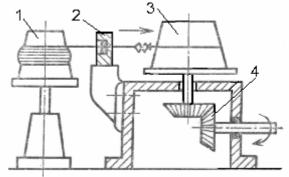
Drum-type drawing bench: 1 – whirly with a coil of wire; 2 – die; 3 – dram; 4 – gear transmission
